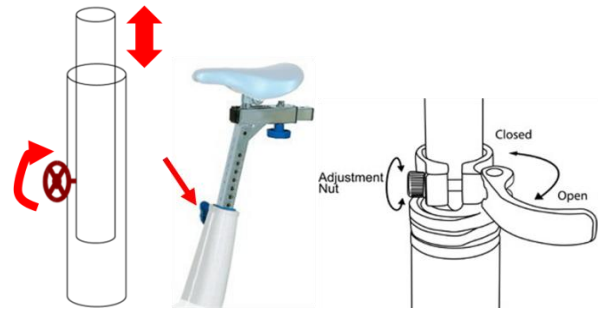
Locking mechanisms featured in tube-within-a-tube system. From left to right: Pinch bolt or screws which press against the inner tube with force that keeps it in place; pull pins which lock a position by sitting in interval holes; and clamp which squeezes pieces together using friction to stay in place.
